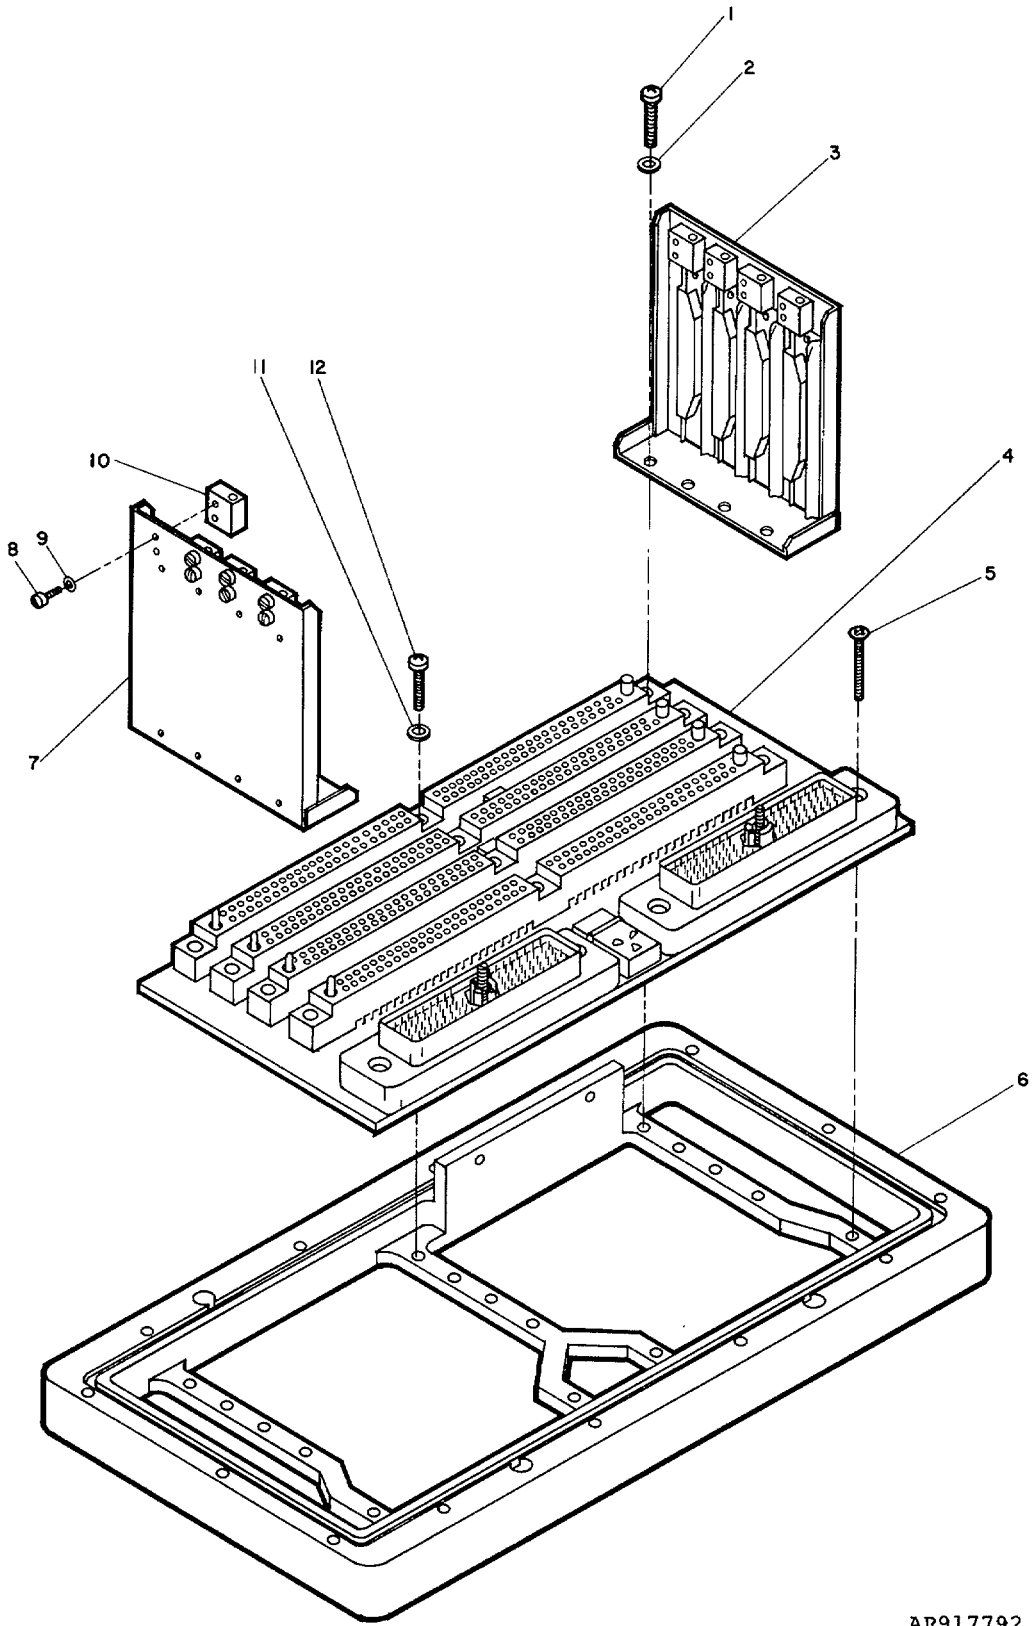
Circuit Card Assembly 2A4, Power Supply and Built-In Test
